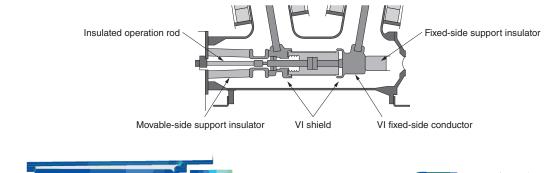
Construction of VI Electrical Field Relieving Shield (Fixed Side)
